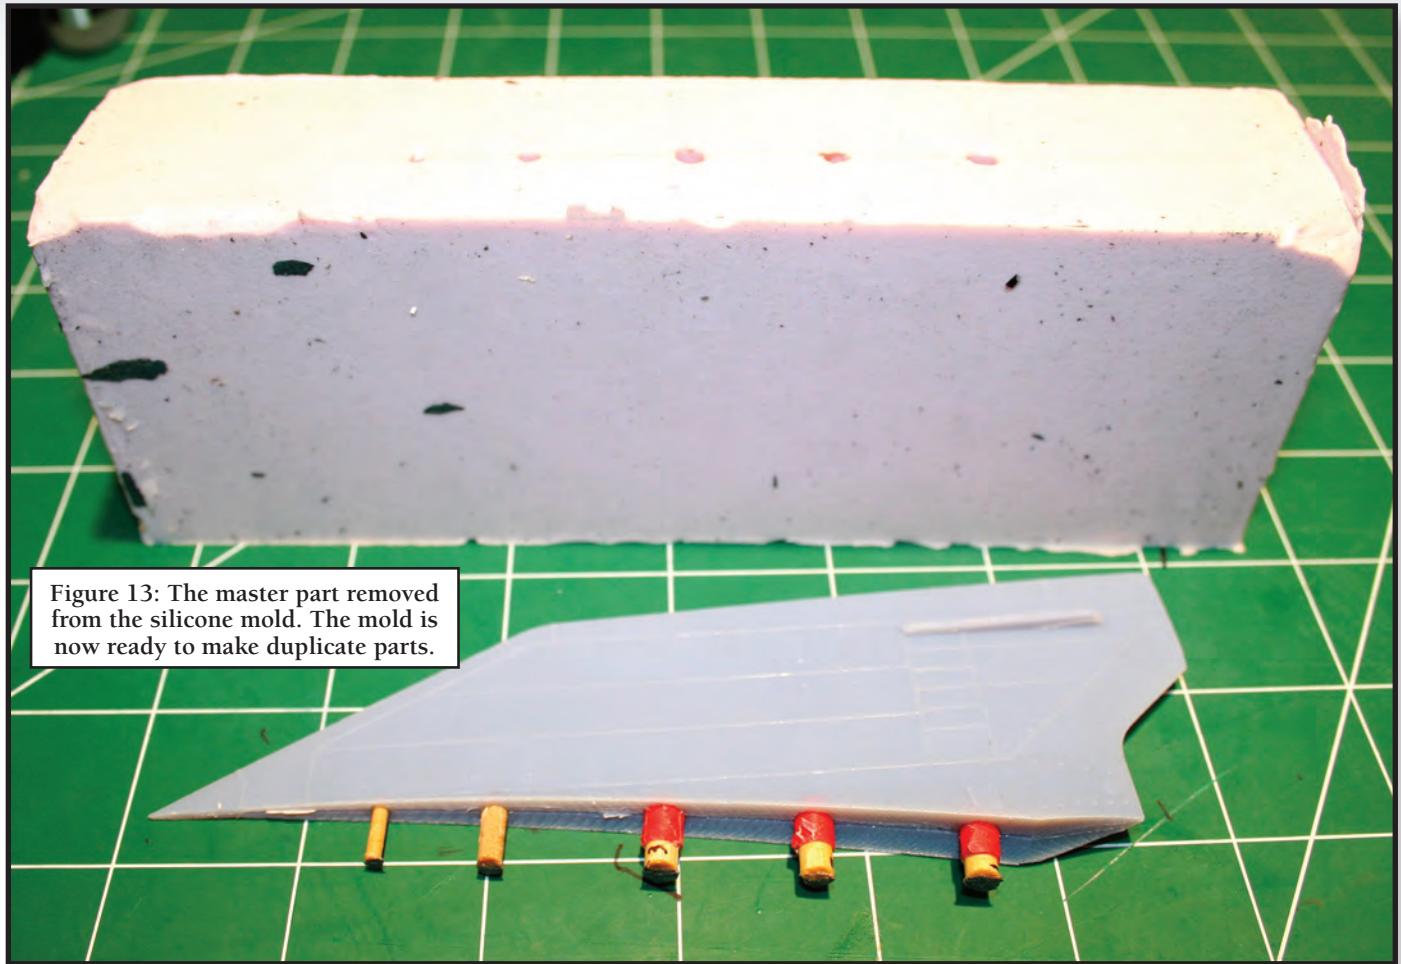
The master part removed from the silicone mold. The mold is now ready to make duplicate parts.
